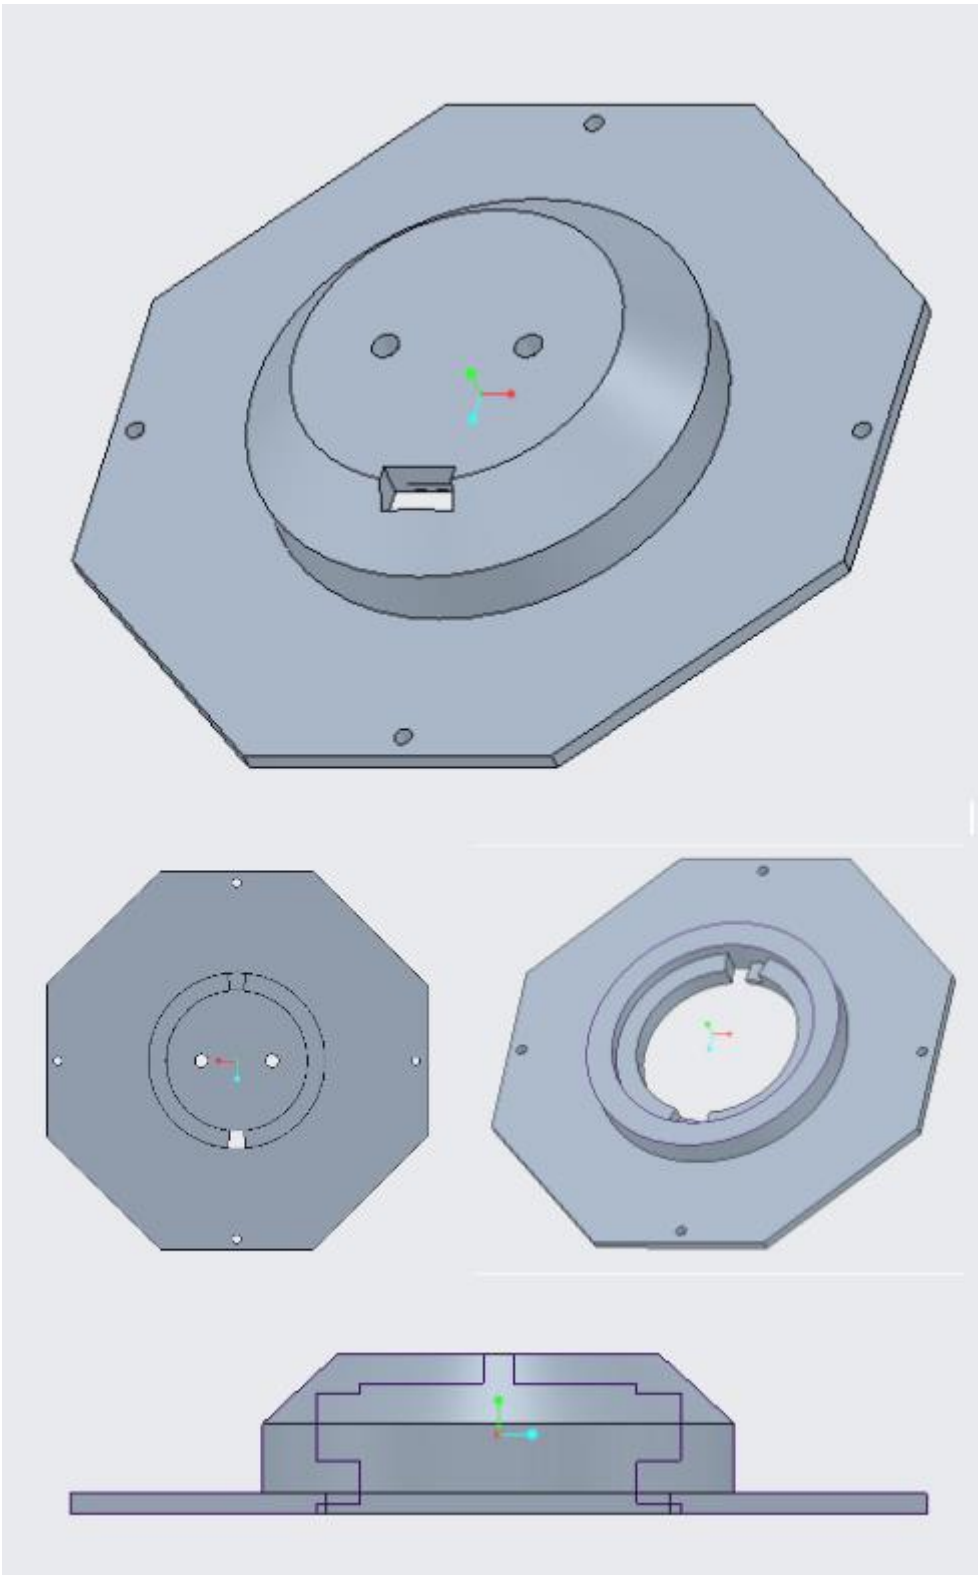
The battery chamber, top and tilted view; tilted and side cross section view
